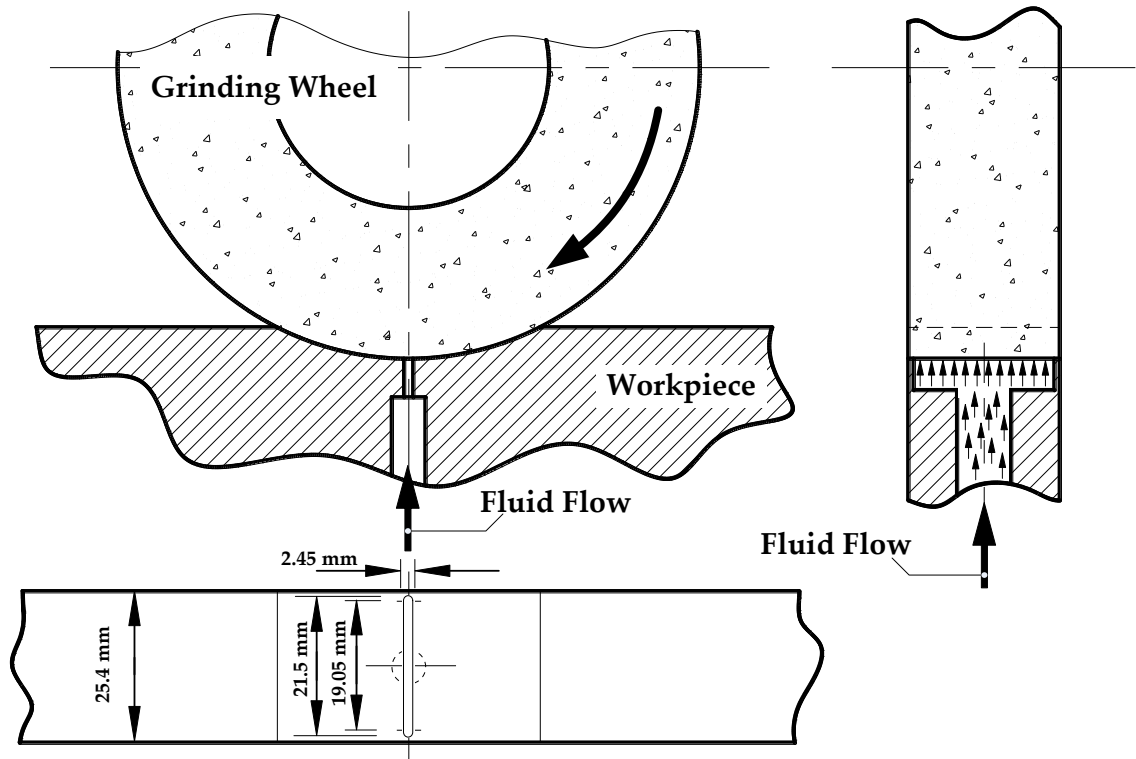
Coolant exit geometry at workpiece wheel contact
